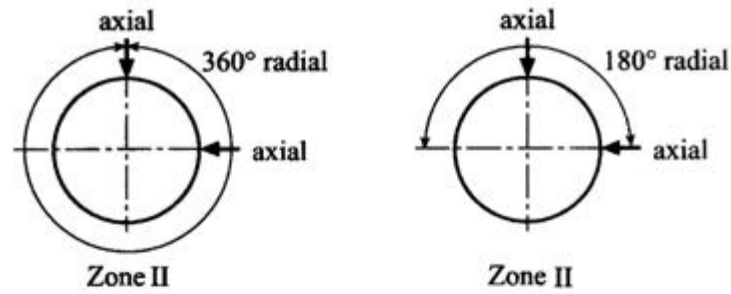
Inspection zones for magnetic particle testing of crank shafts
